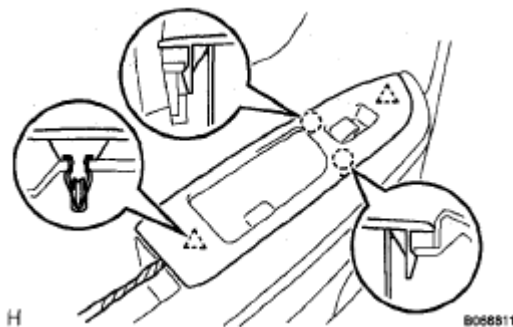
Identifying Rear Door Armrest Base Panel Claws And Clips
